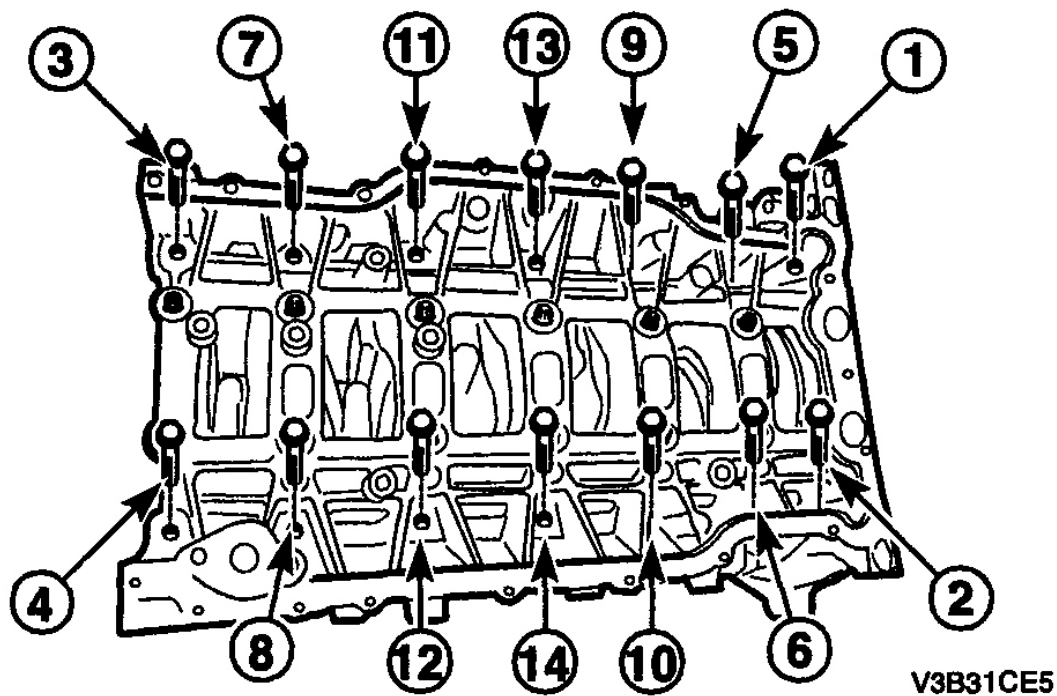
Identifying Bed Plate Outer Bolts Removing Sequence
